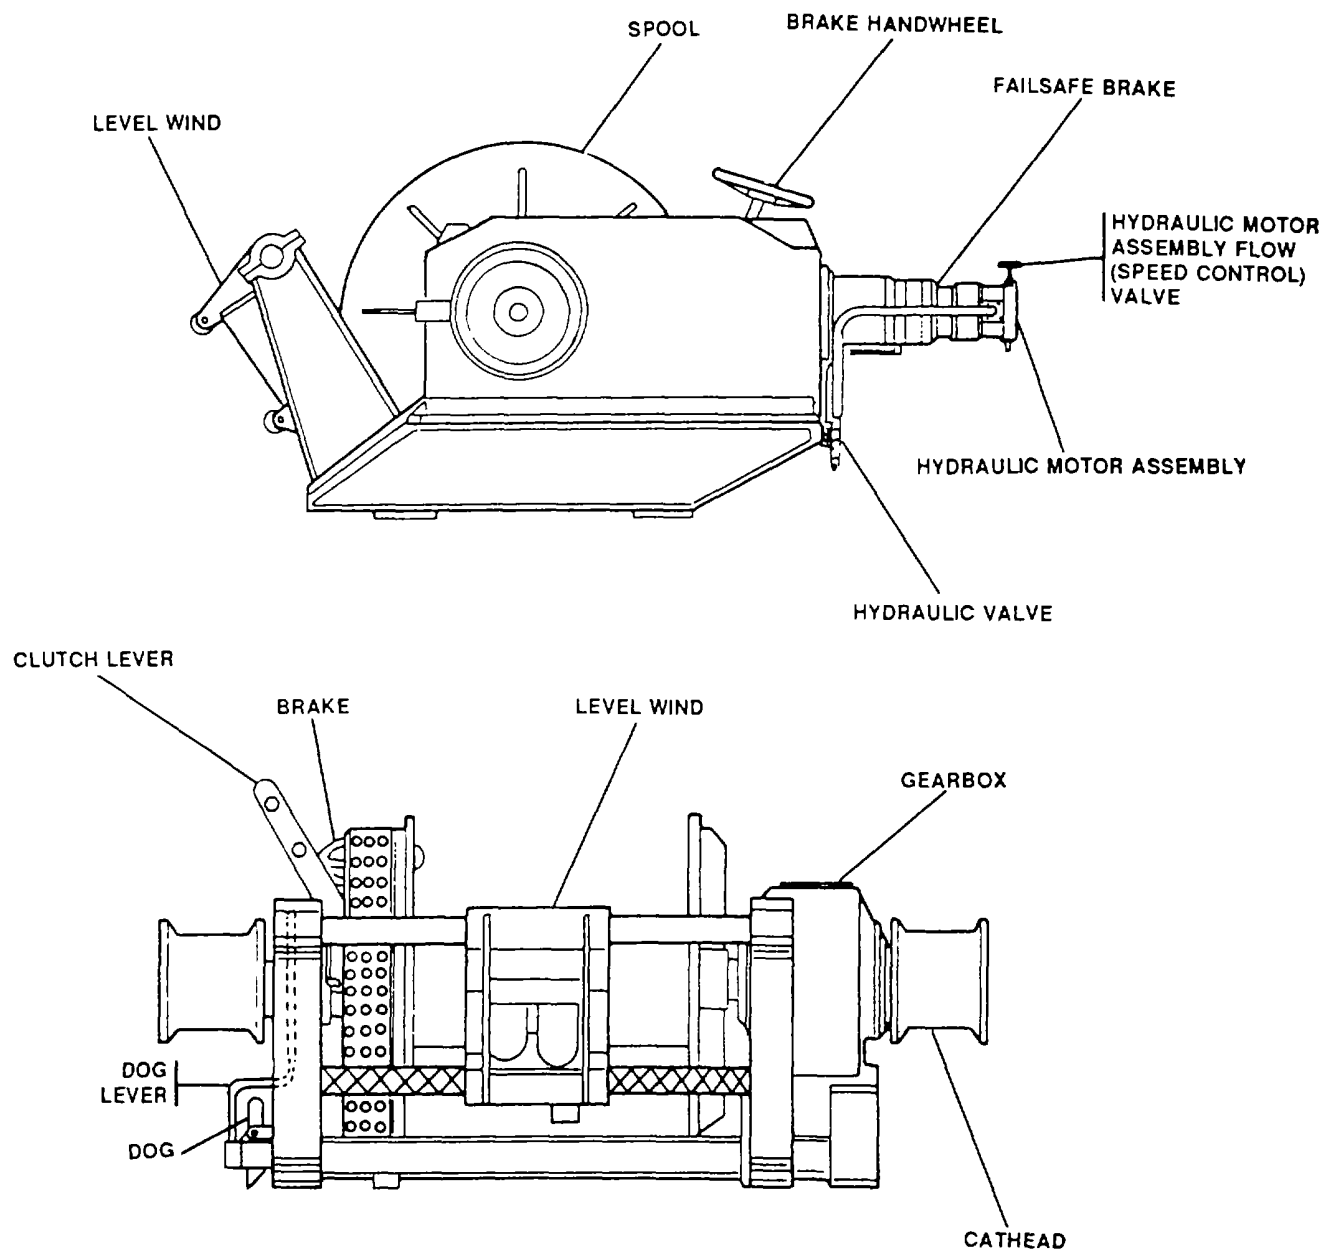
Stern Anchor Winch Assembly Component Location.
